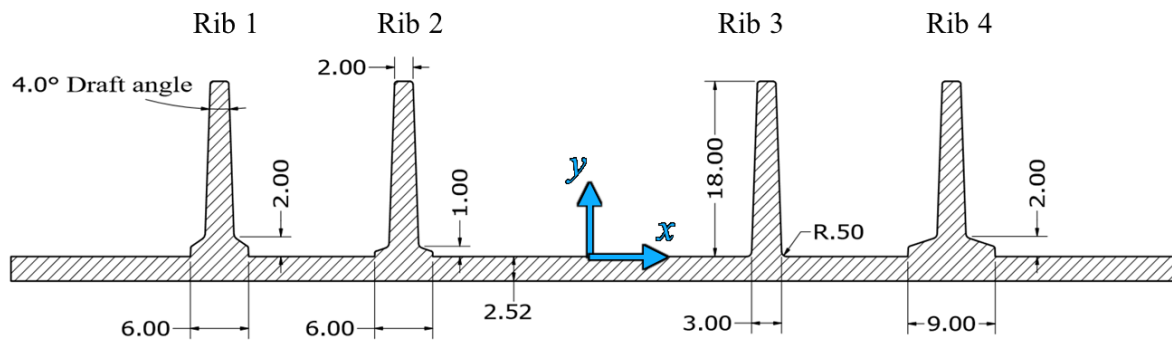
Ribbed plate cross-section, showing key dimensions (in mm) for all four rib designs.
